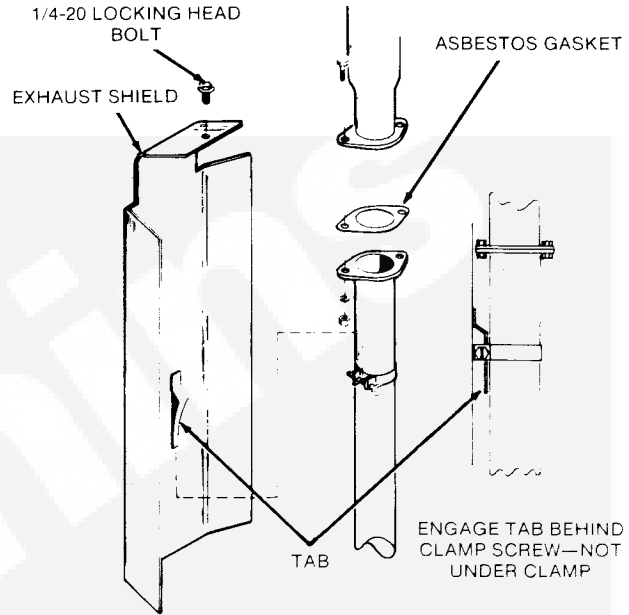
EXHAUST SHIELD TAB ENGAGEMENT
